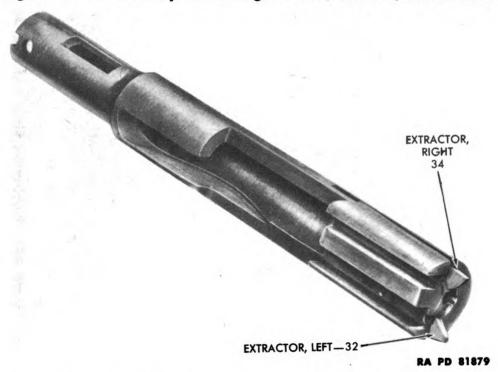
Bolt With Extractors Assembled of Remington Rifle, Cal. .22, Model 513T
